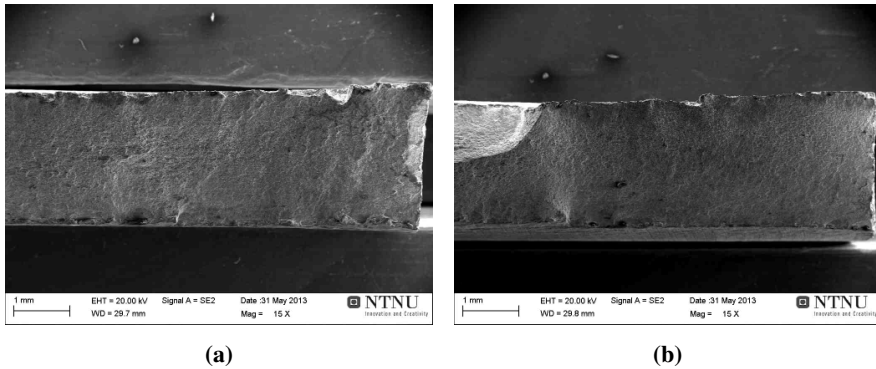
Additional fracture surface overview of the BM tensile specimens representing the (a) transverse and (b) longitudinal direction.
